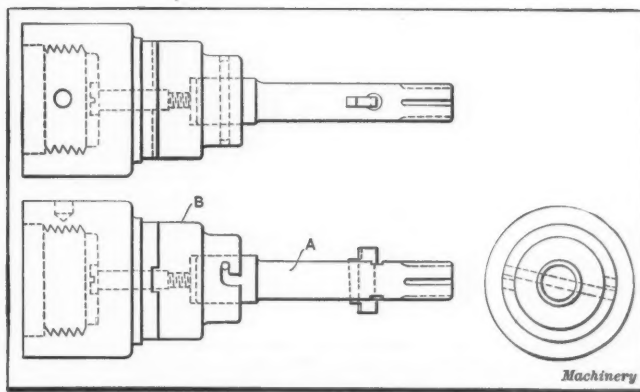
Back-facing Bar with Holder similar in Purpose to the one shown in Fig. 2
